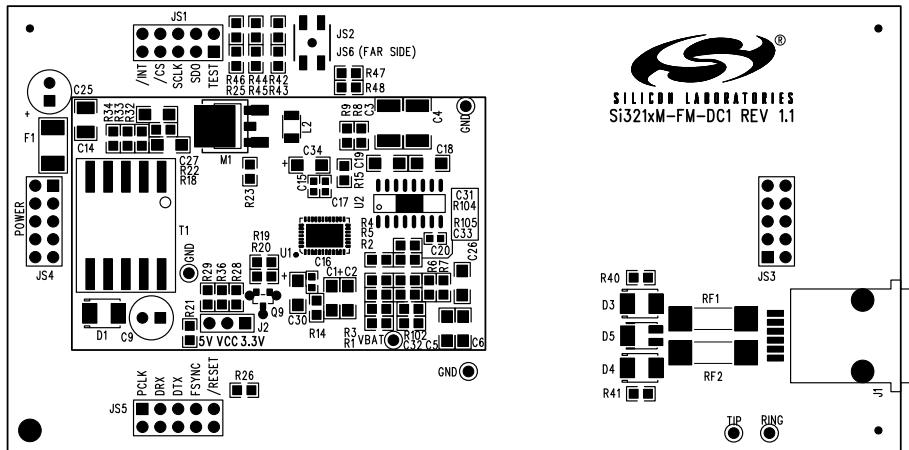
Si321xM-FM-DC1-EVB with Si3201 Primary Assembly
